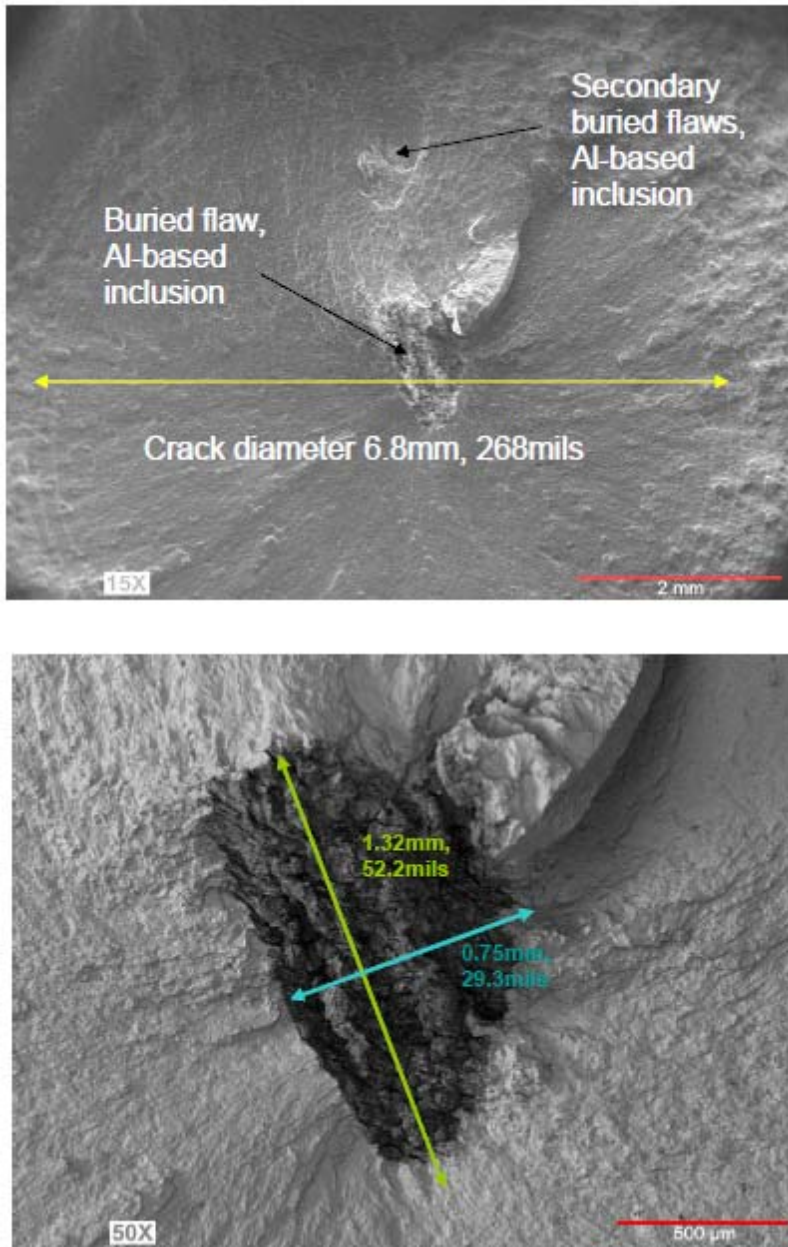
Fracture surface for specimen MWF 6115
